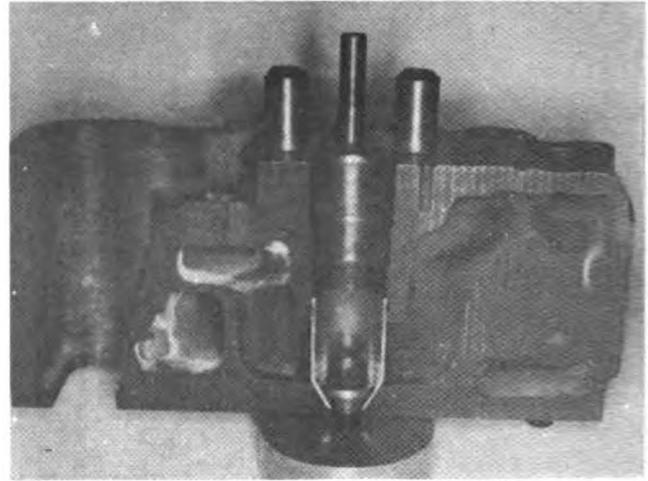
(N10278). Cross-Section Of The ST-1179 Injector Sleeve Holding Tool.
